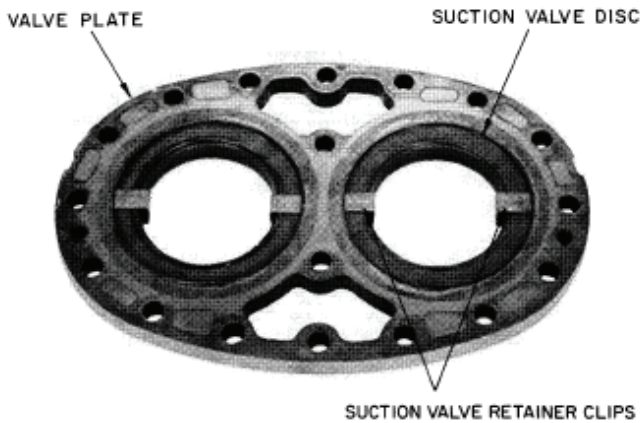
Valve Clips in Place Cylinder and Unloader Sleeves
